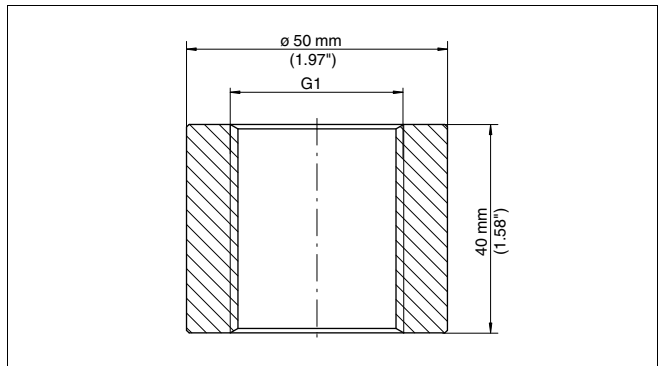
Dimensions welded socket thread G1 A according to DIN ISO 228-1
